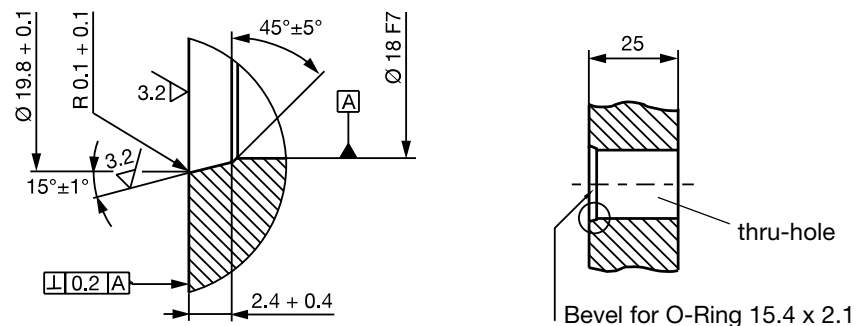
Thru-hole design for mounting BTL with O-ring
